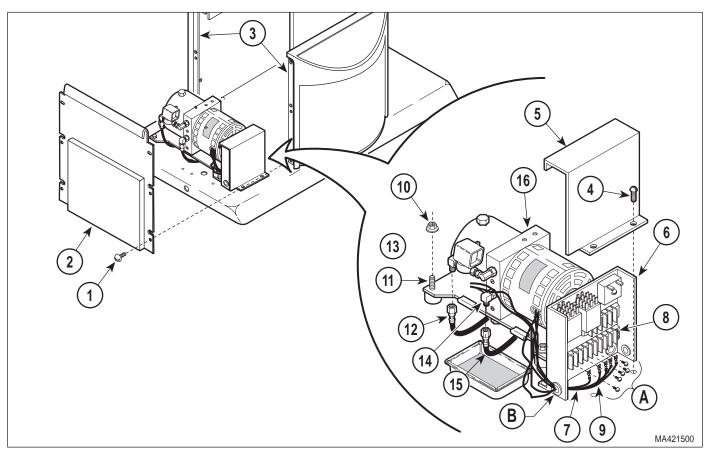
Motor Pump Assembly - Complete Removal / Installation
